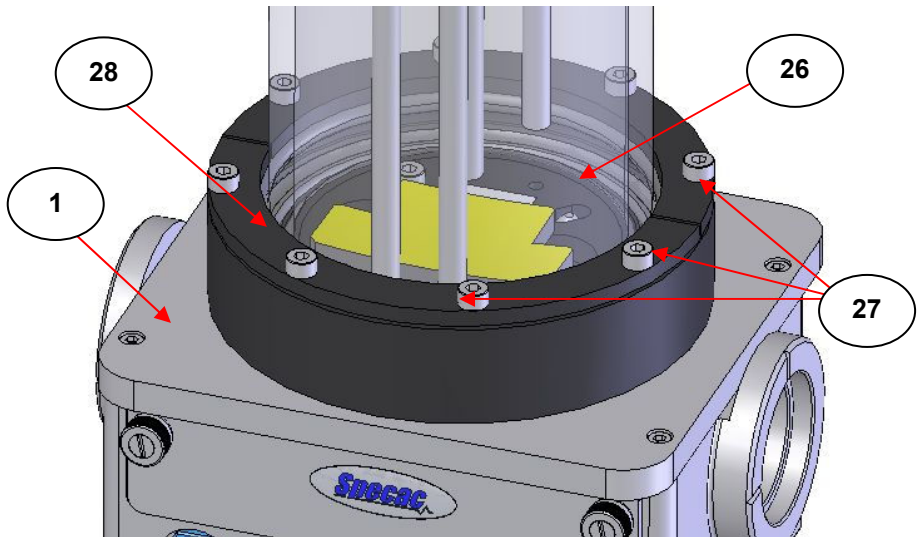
T5 Gas Cell Outer Cylinder (G) or (M) Assembly Removal
